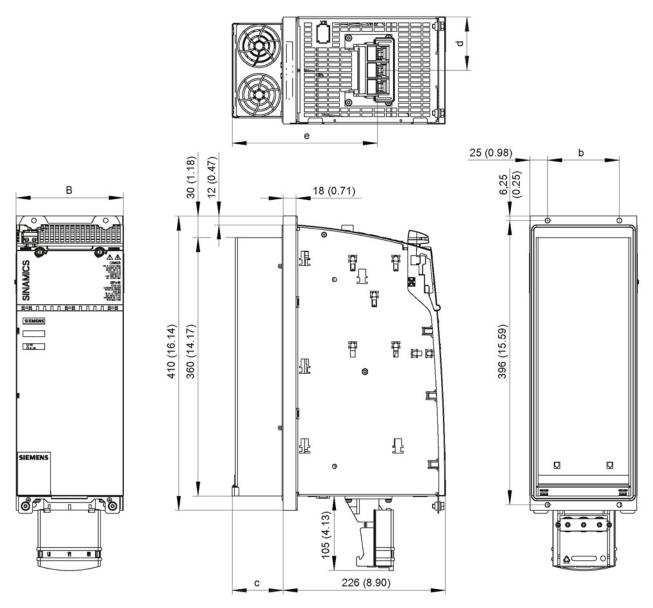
Dimension drawing of 36 kW, 55 kW, 80 kW, and 120 kW Active Line Modules with external air cooling (example 36 kW), all dimensions in mm and (inches)
